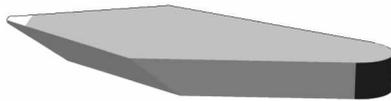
A single diamond radiator designed for TORE SUPRA experiments. The metal coatings (grey) should be deposited upon all the radiator surfaces, except for the part marked in white. The front (rounded) corner of the diamond radiator should be coated by a Mo-filter
